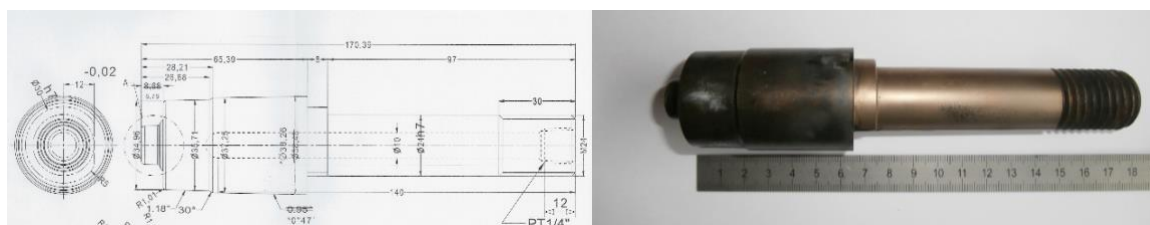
Core-slider. Test surface $\varnothing 38.26 \times 65.39\text{ mm}$; a) core diagram; b) slide core before texturing and PVD coating
